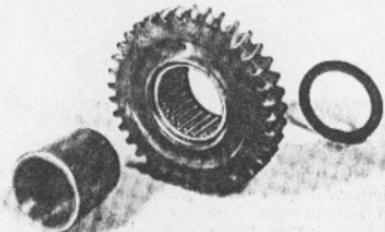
Rework 1st gear, special thrust washer and needle bearing.
